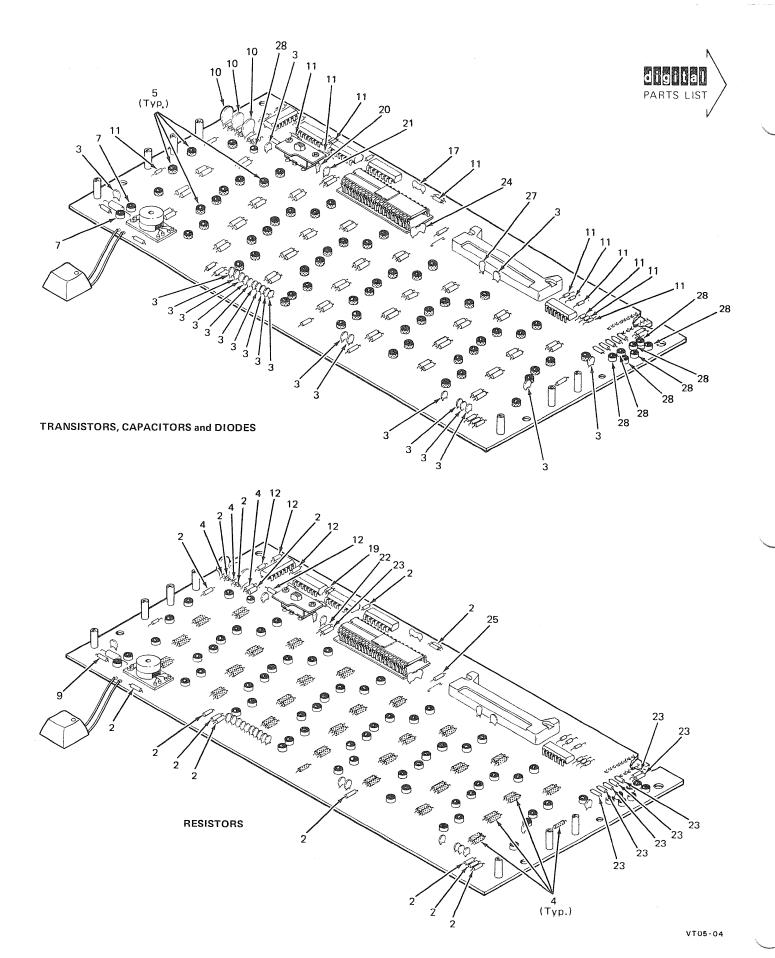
LK01 Keyboard Assembly (Sheet 2 of 2)
